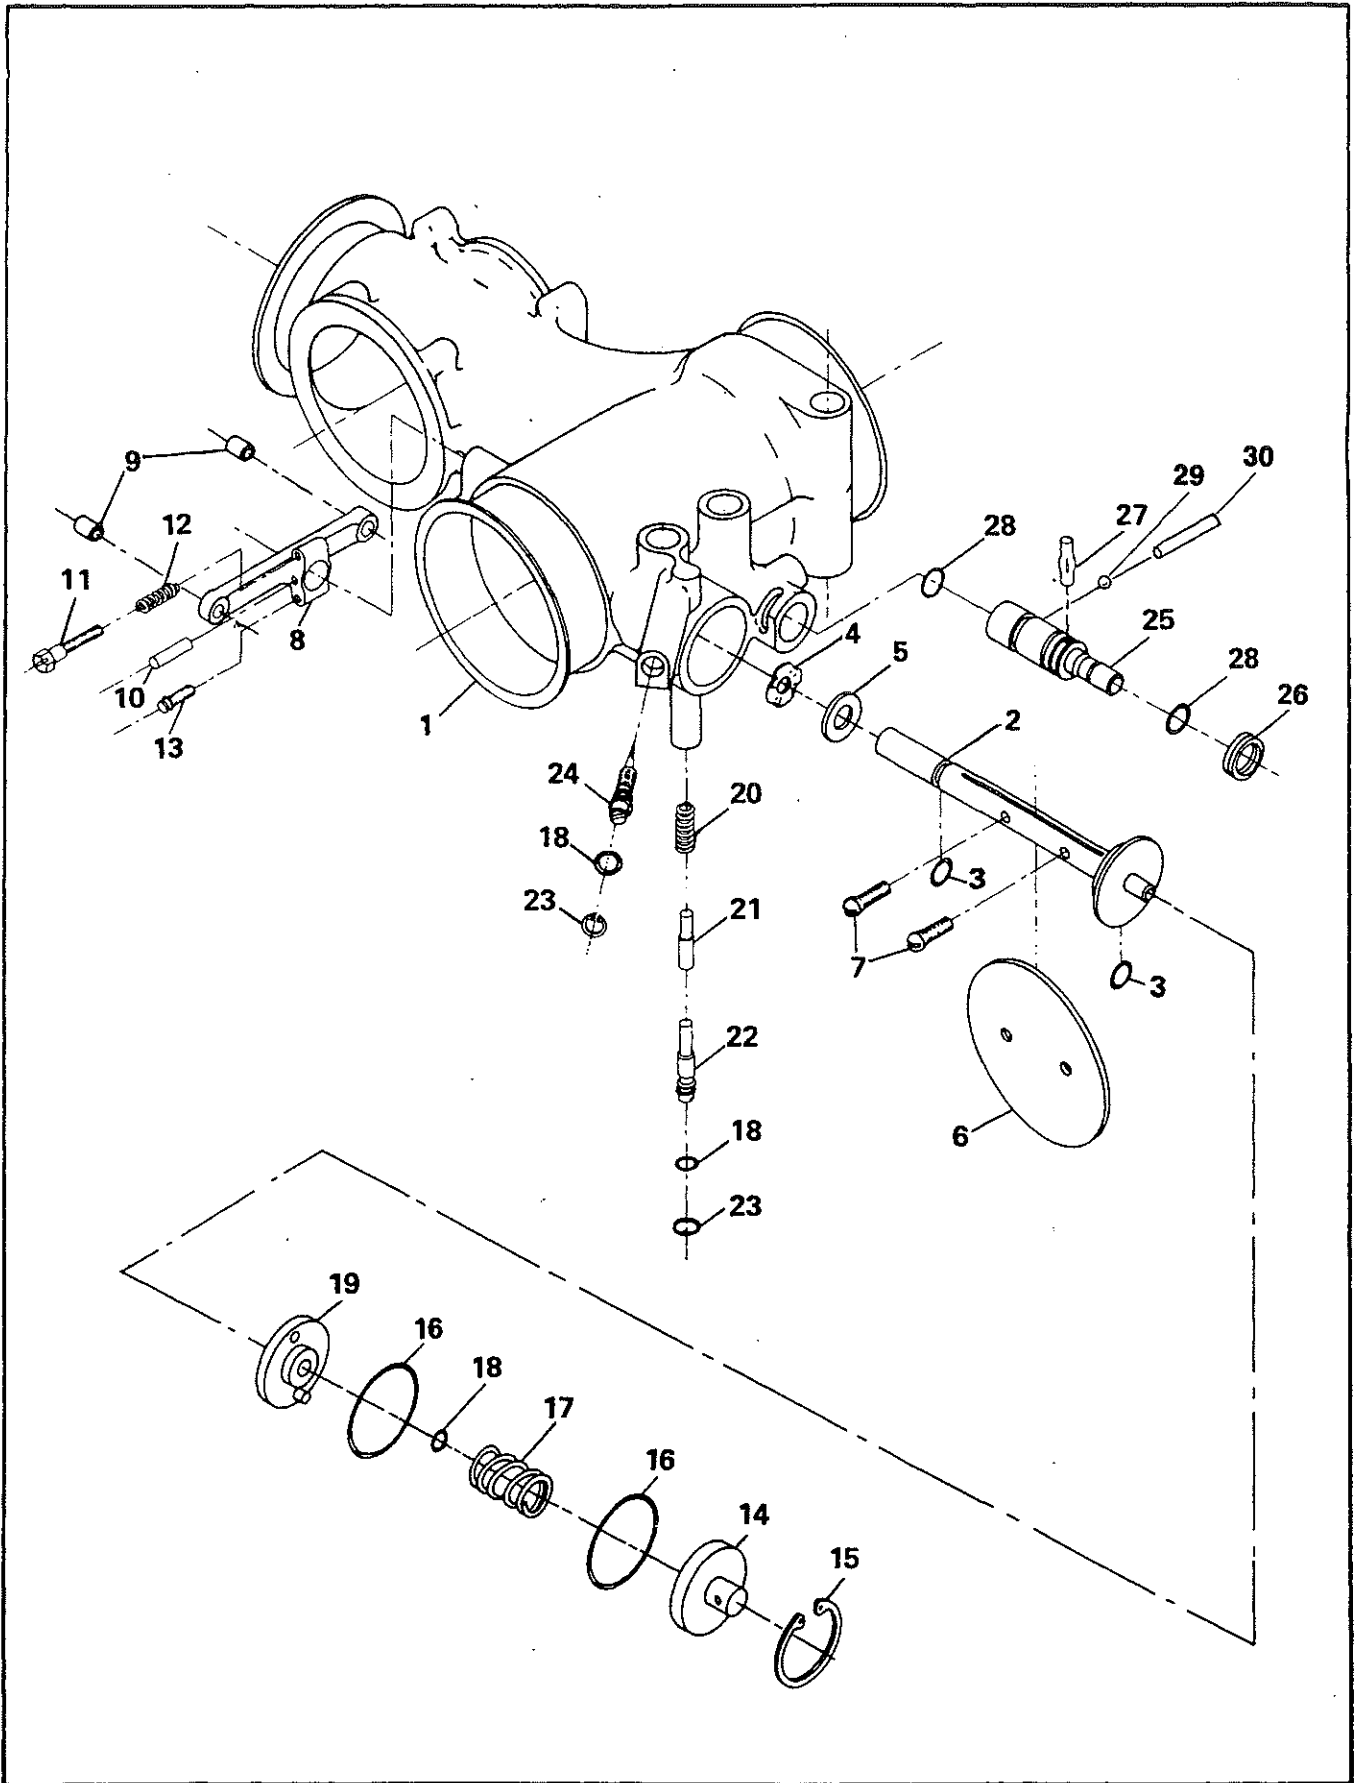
AIR THROTTLE AND FUEL METERING ASSEMBLY.
